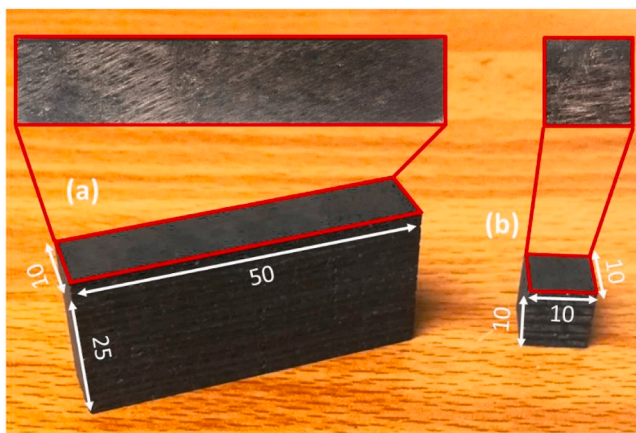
Example of specimens used in the experimental campaign. The lower specimen (a) is a 50×10×25 mm prism, the upper specimen (b) is a cube with 10 mm edge. A detail of frictional surfaces is also provided. The adjectives “lower” and “upper” are referred to their position in the set-up configuration shown in Fig. 1.
